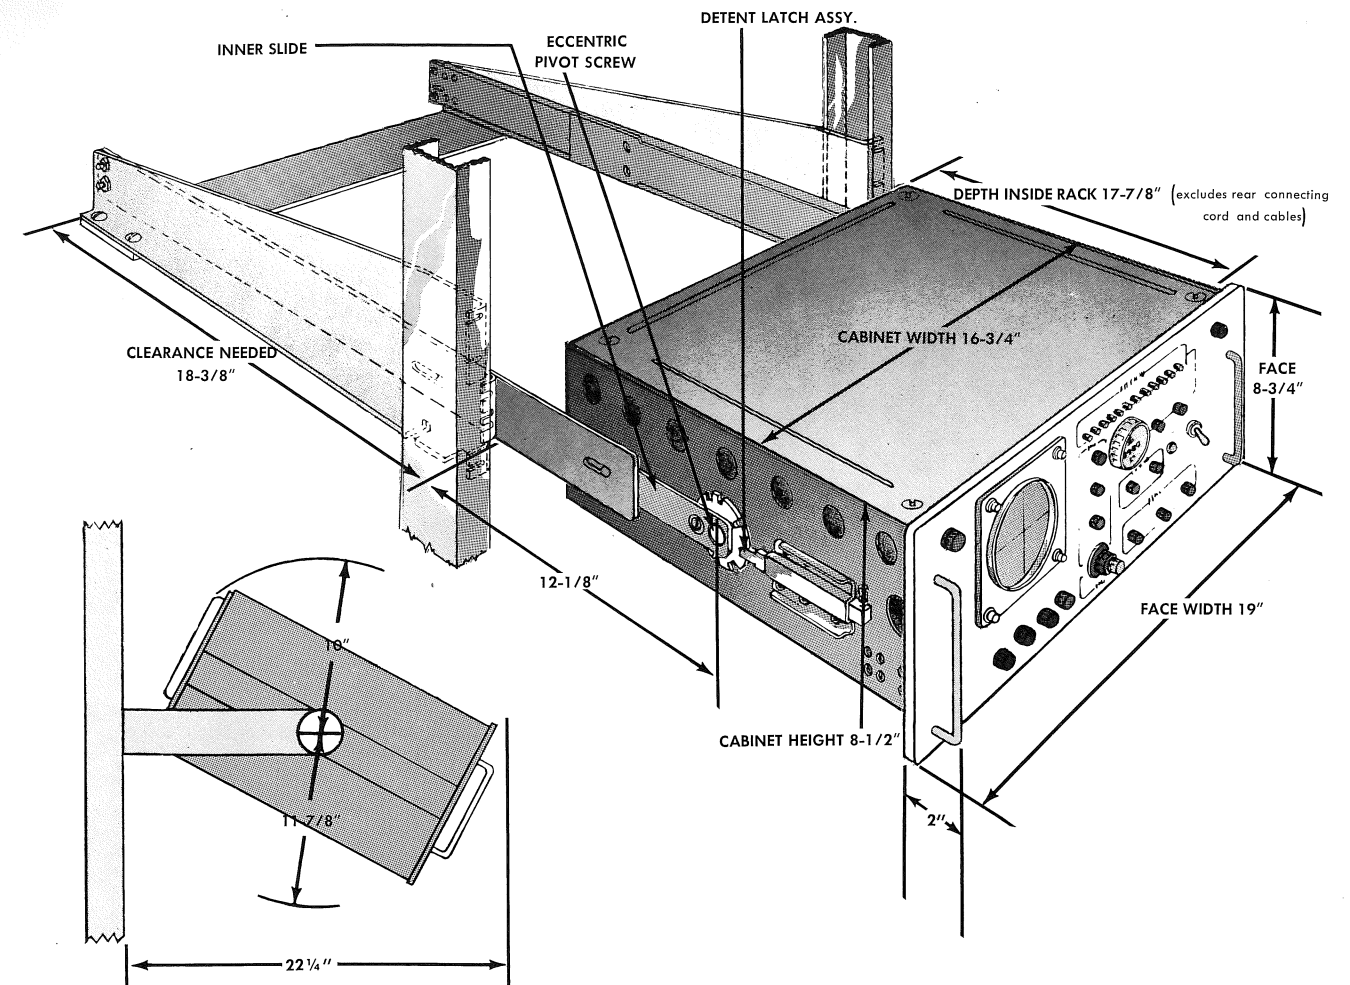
Vectorscope mounting dimensions. These dimensions indicate the space you must allow for mounting the Vectorscope.
